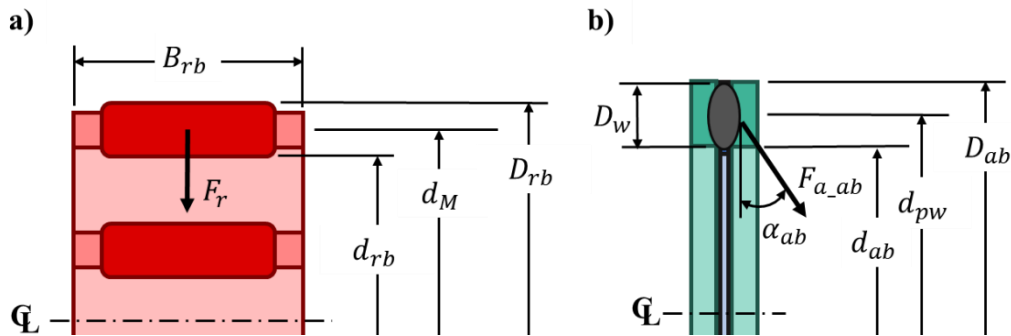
a) Radial bearings' geometry and force factors. b) Axial bearing' geometry and force factors. (Author)
